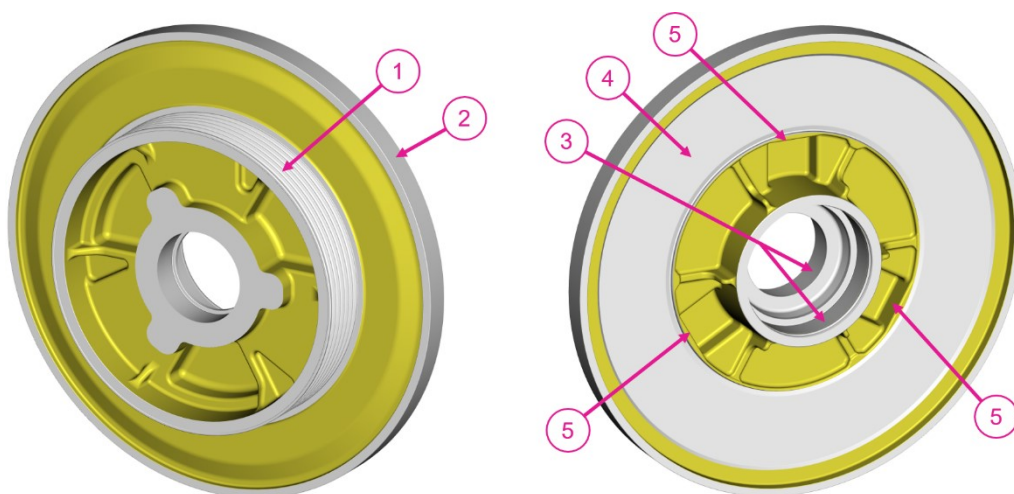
Traction sheave with functional surfaces indicated. 1: rope grooves, 2: brake surface, 3: bearing housings, 4: magnet surface, 5: possible fixing planes for machining.
